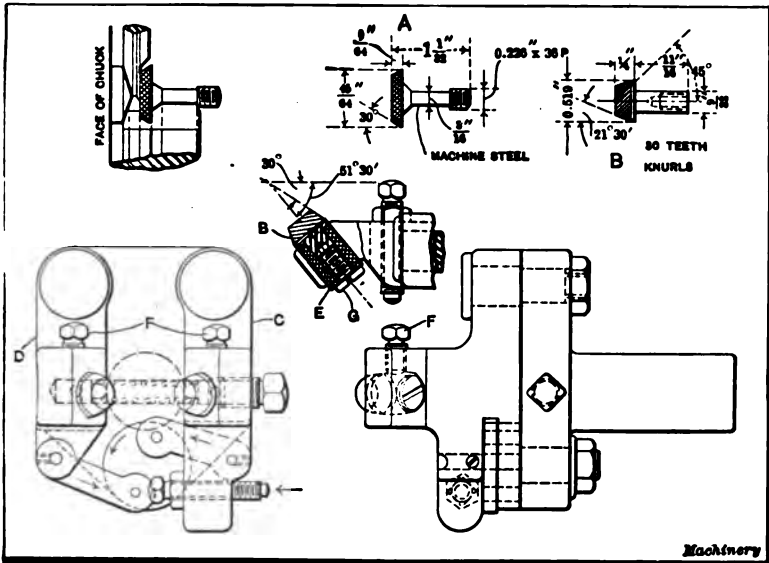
Opening Type of Turret Knurl-holder for Bevel Knurling
